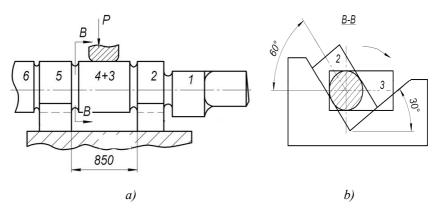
Sketch installing of the six-throw crankshaft for turning the throw 3 (a), turning the throw 3 by the 60° angle (b)
